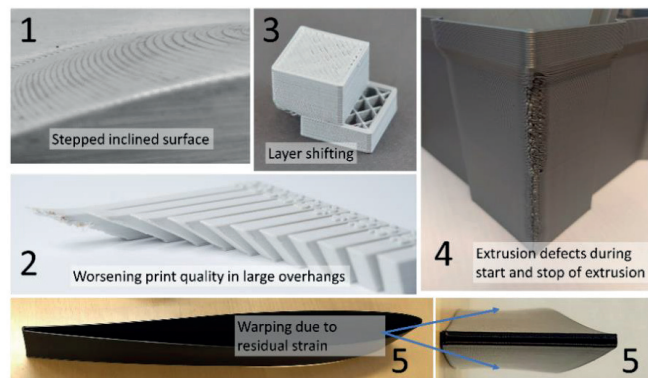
Examples of defects due to 1) layer sampling (reproduced from appended Paper1, 2) lack of printing fundament (reproduced from [37]), 3) inaccuracies during positioning (reproduced from [38]), 4) inaccuracies during extrusion, and 5) residual strain.
